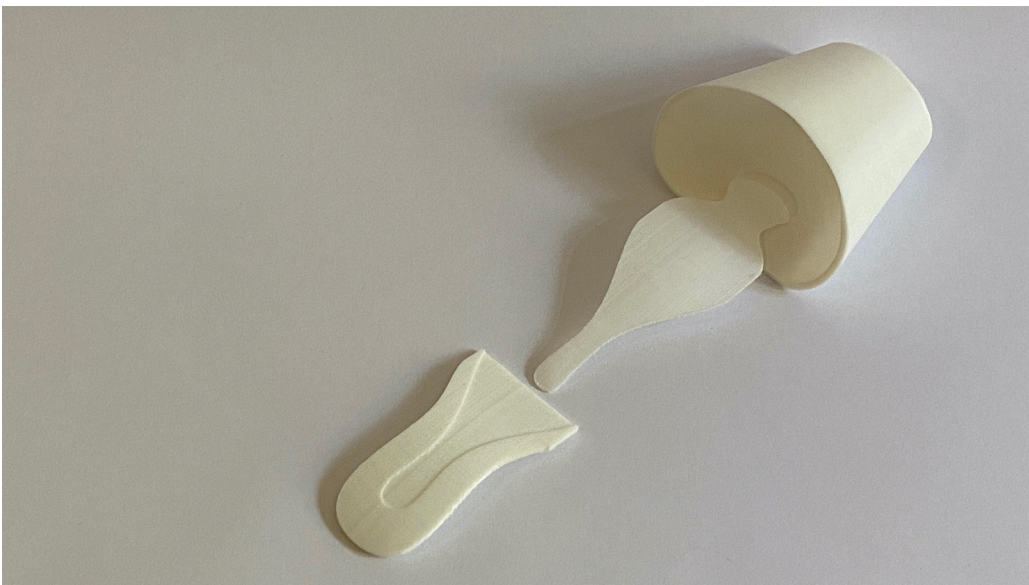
The flexible part is designed as an extra piece that would be printed aside and that it would be attached on a recess on the box and the rigid part of the sole.
